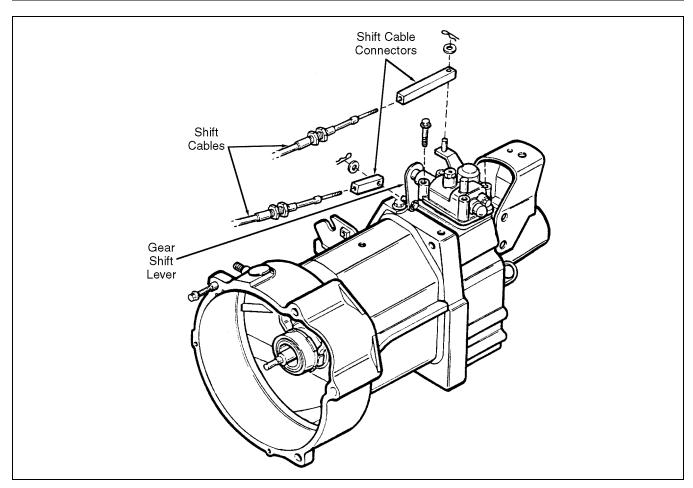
E-2. Gear Shift Cables/Connectors (Diesel Engine)
